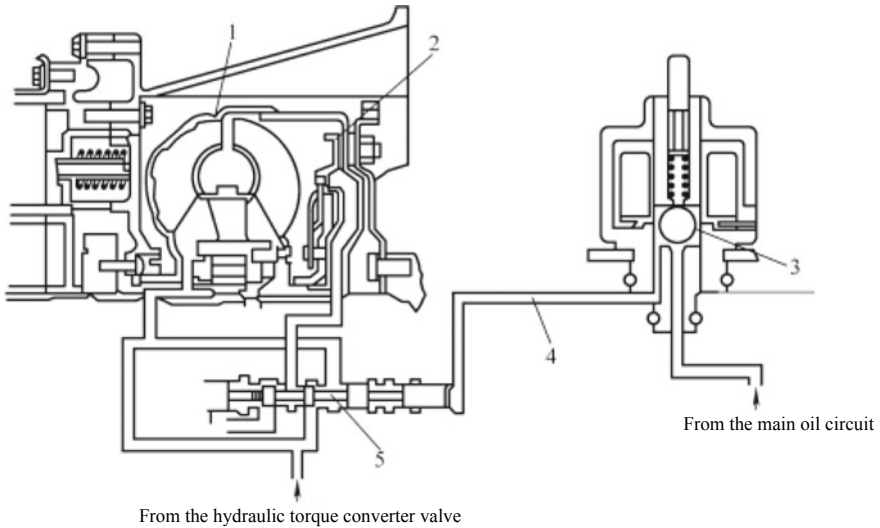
Working principle of the lockup clutch control valve of the hydraulic torque converter. 1—Torque converter, 2—lockup clutch, 3—pulse linear lockup solenoid valve, 4—adjustable control pressure, 5—lockup clutch control valve
